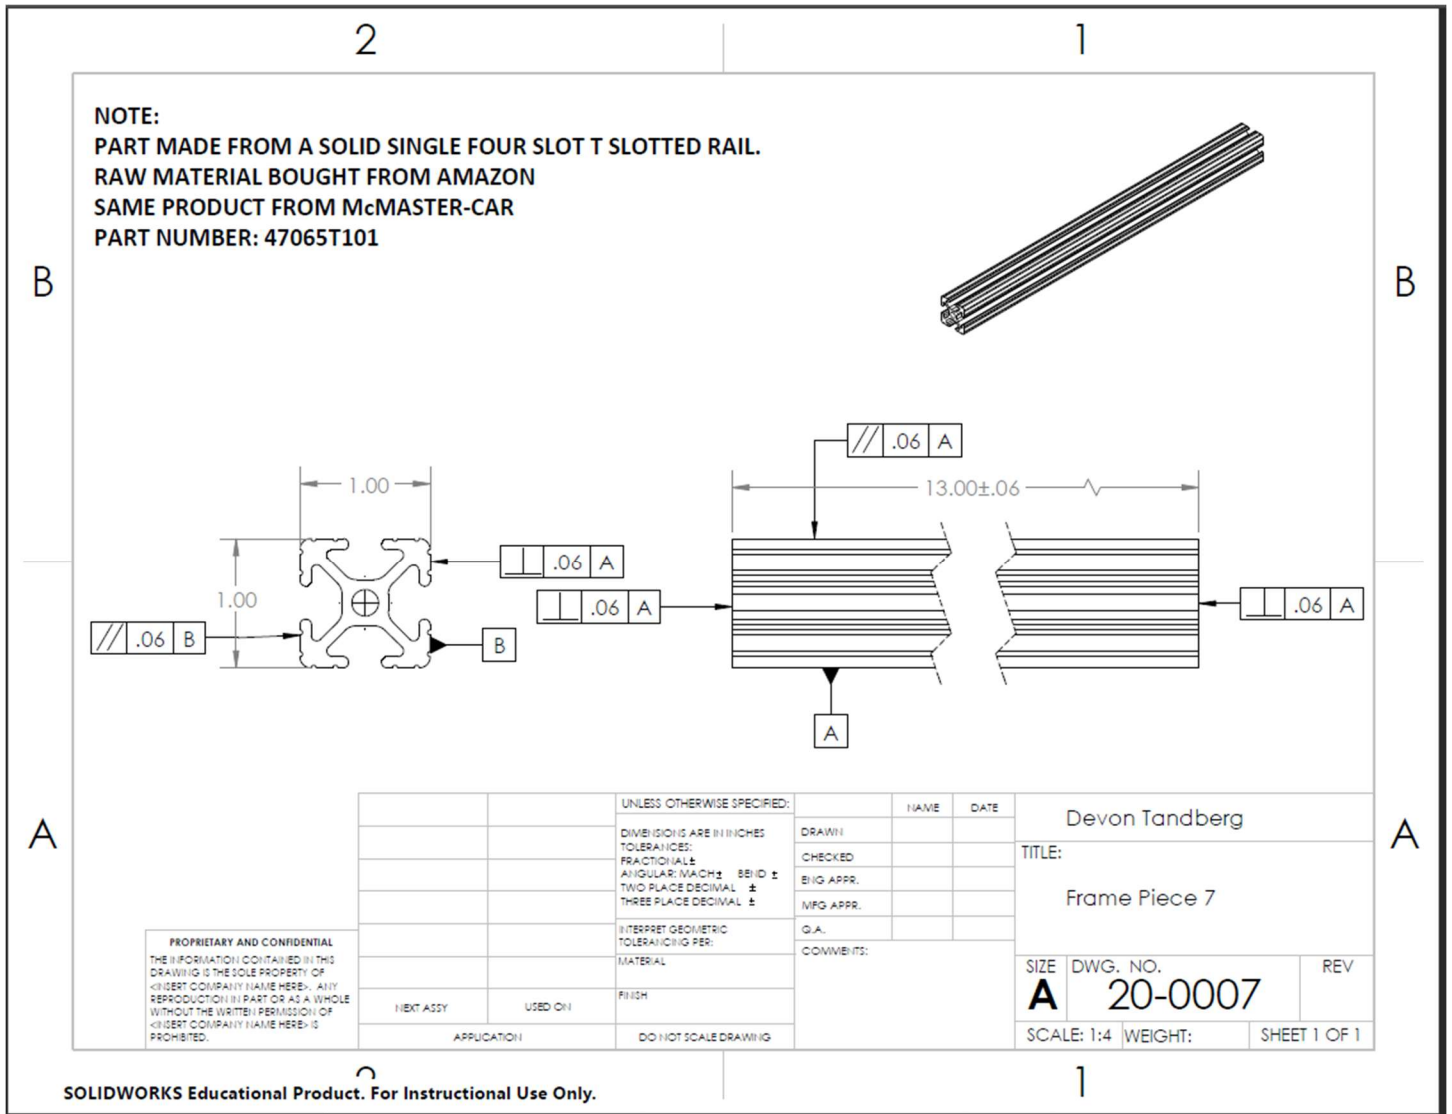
Part 20-0007 Drawing – Frame Piece 7 Length 13”
